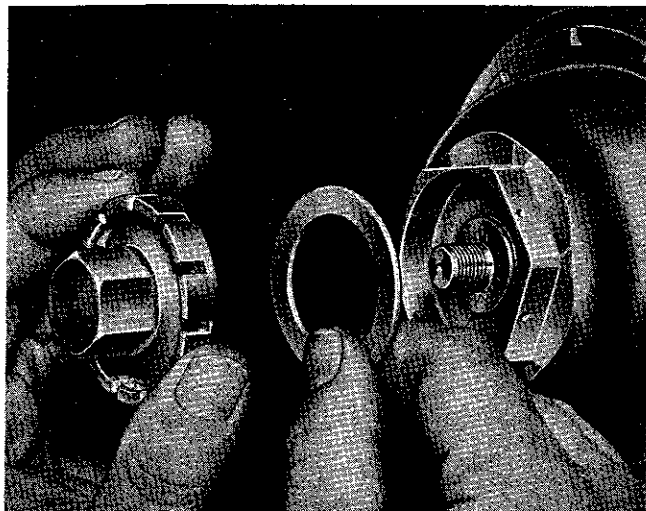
Installing Cylinder Head Clamp Nut Gasket and Nut — 2E40 Model
